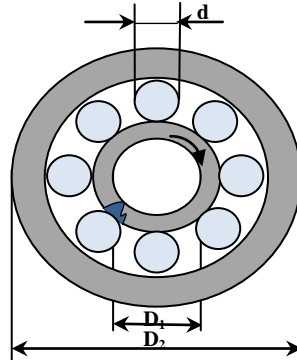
Diagram of a ball bearing with a defect on the inner race
